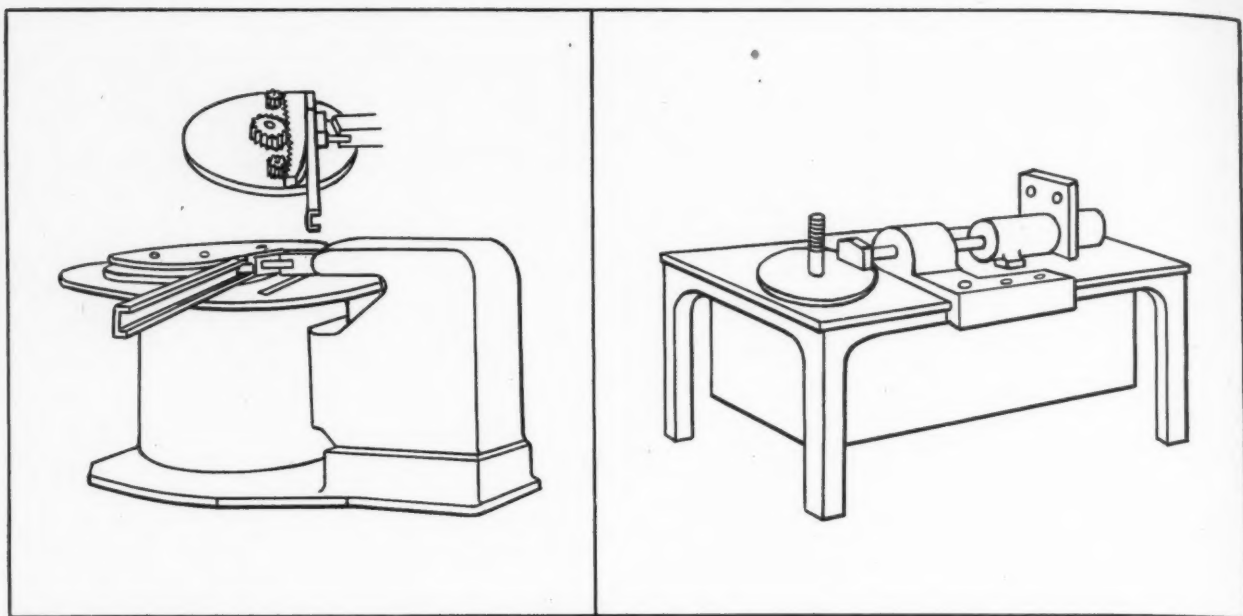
(Left) Yoder Type Wrap-forming Machine. Detail View Shows Arrangement Used on This Machine for Rack Die and Gear Forming. Fig. 5 (Right) Vega Type Wrap-forming Machine
